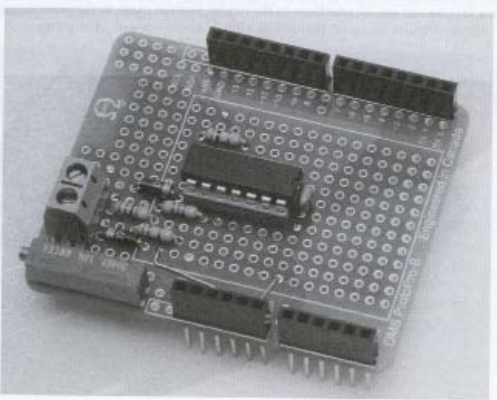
View of completed general purpose panel meter shield with LCD removed.
